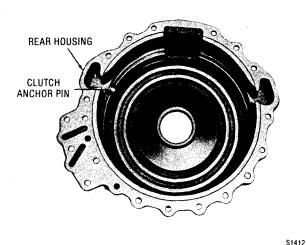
Rear housing and piston assembly (TRT-1)
